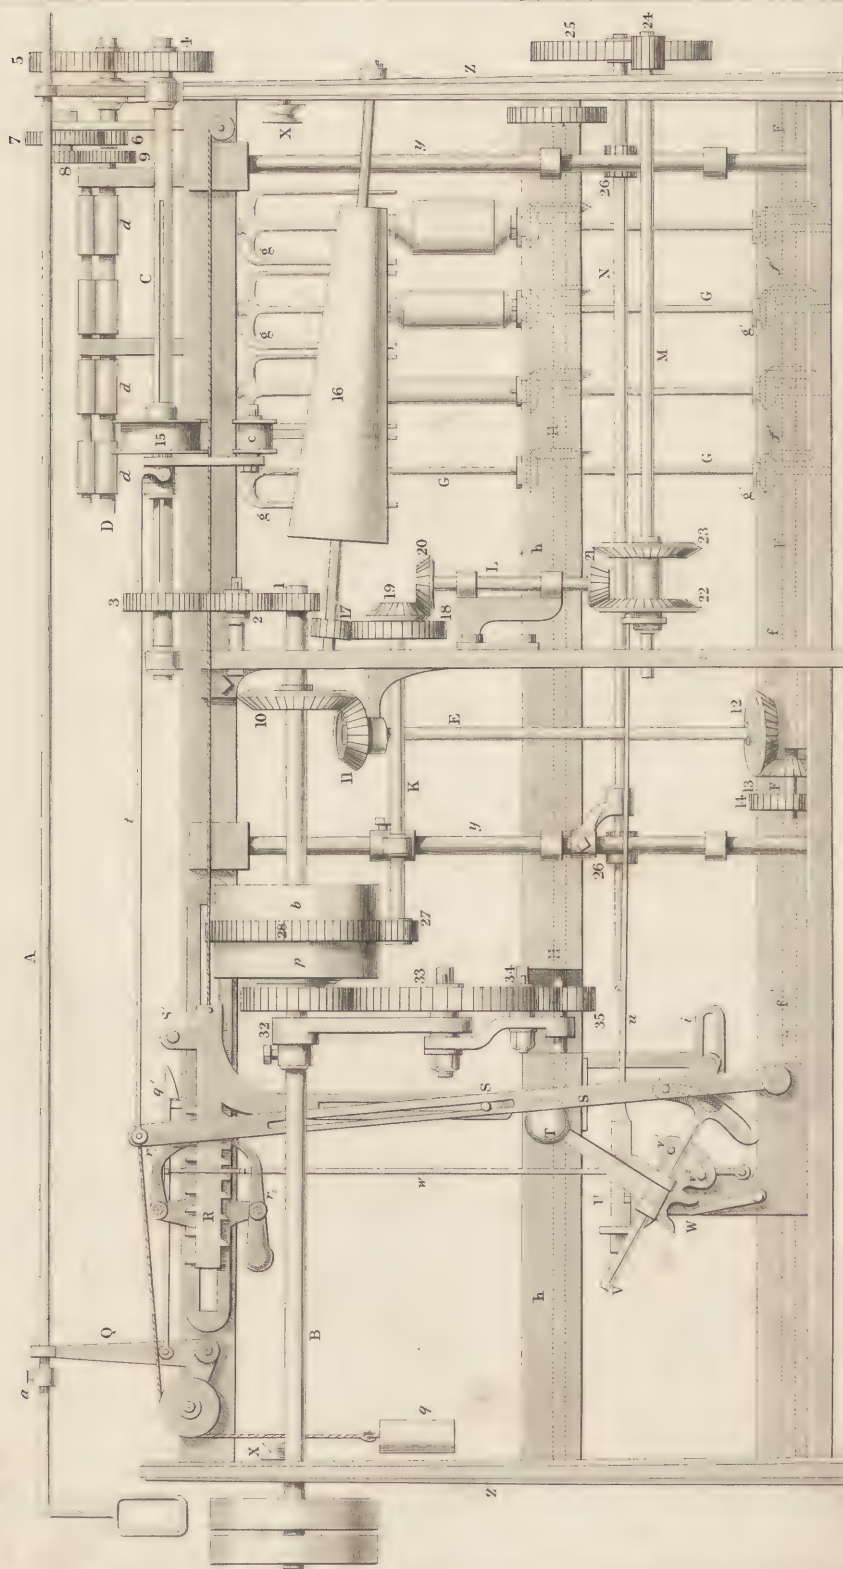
A SIDE VIEW OF THE PRESS, SHOWING THE FRAME AND THE PRESS.
